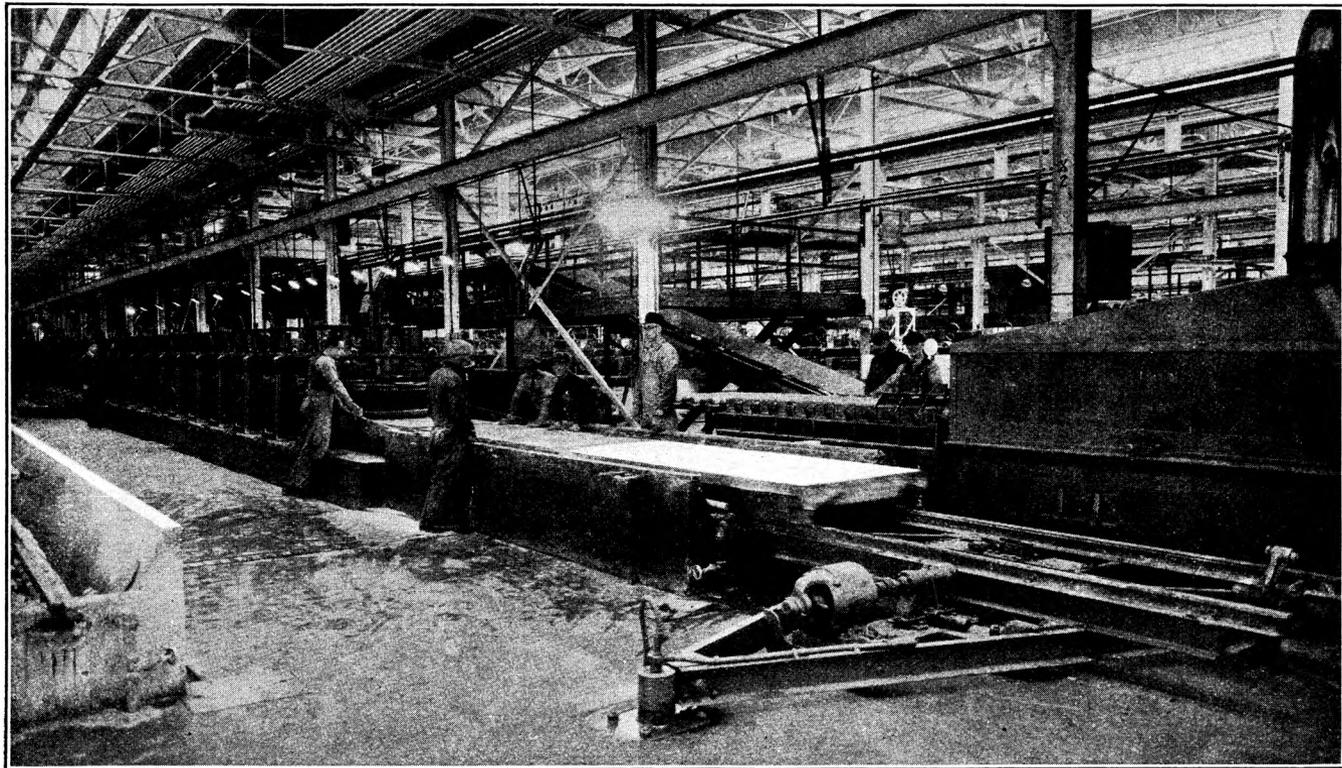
CONTINUOUS PROCESS: END VIEW OF GRINDING AND POLISHING CONVEYOR
